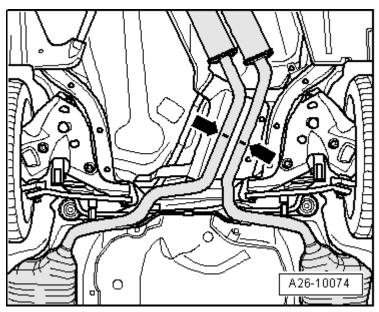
Separating Exhaust Pipes At A Right Angle At Separating Point Using Chain Pipe Cutter VAS 6254
